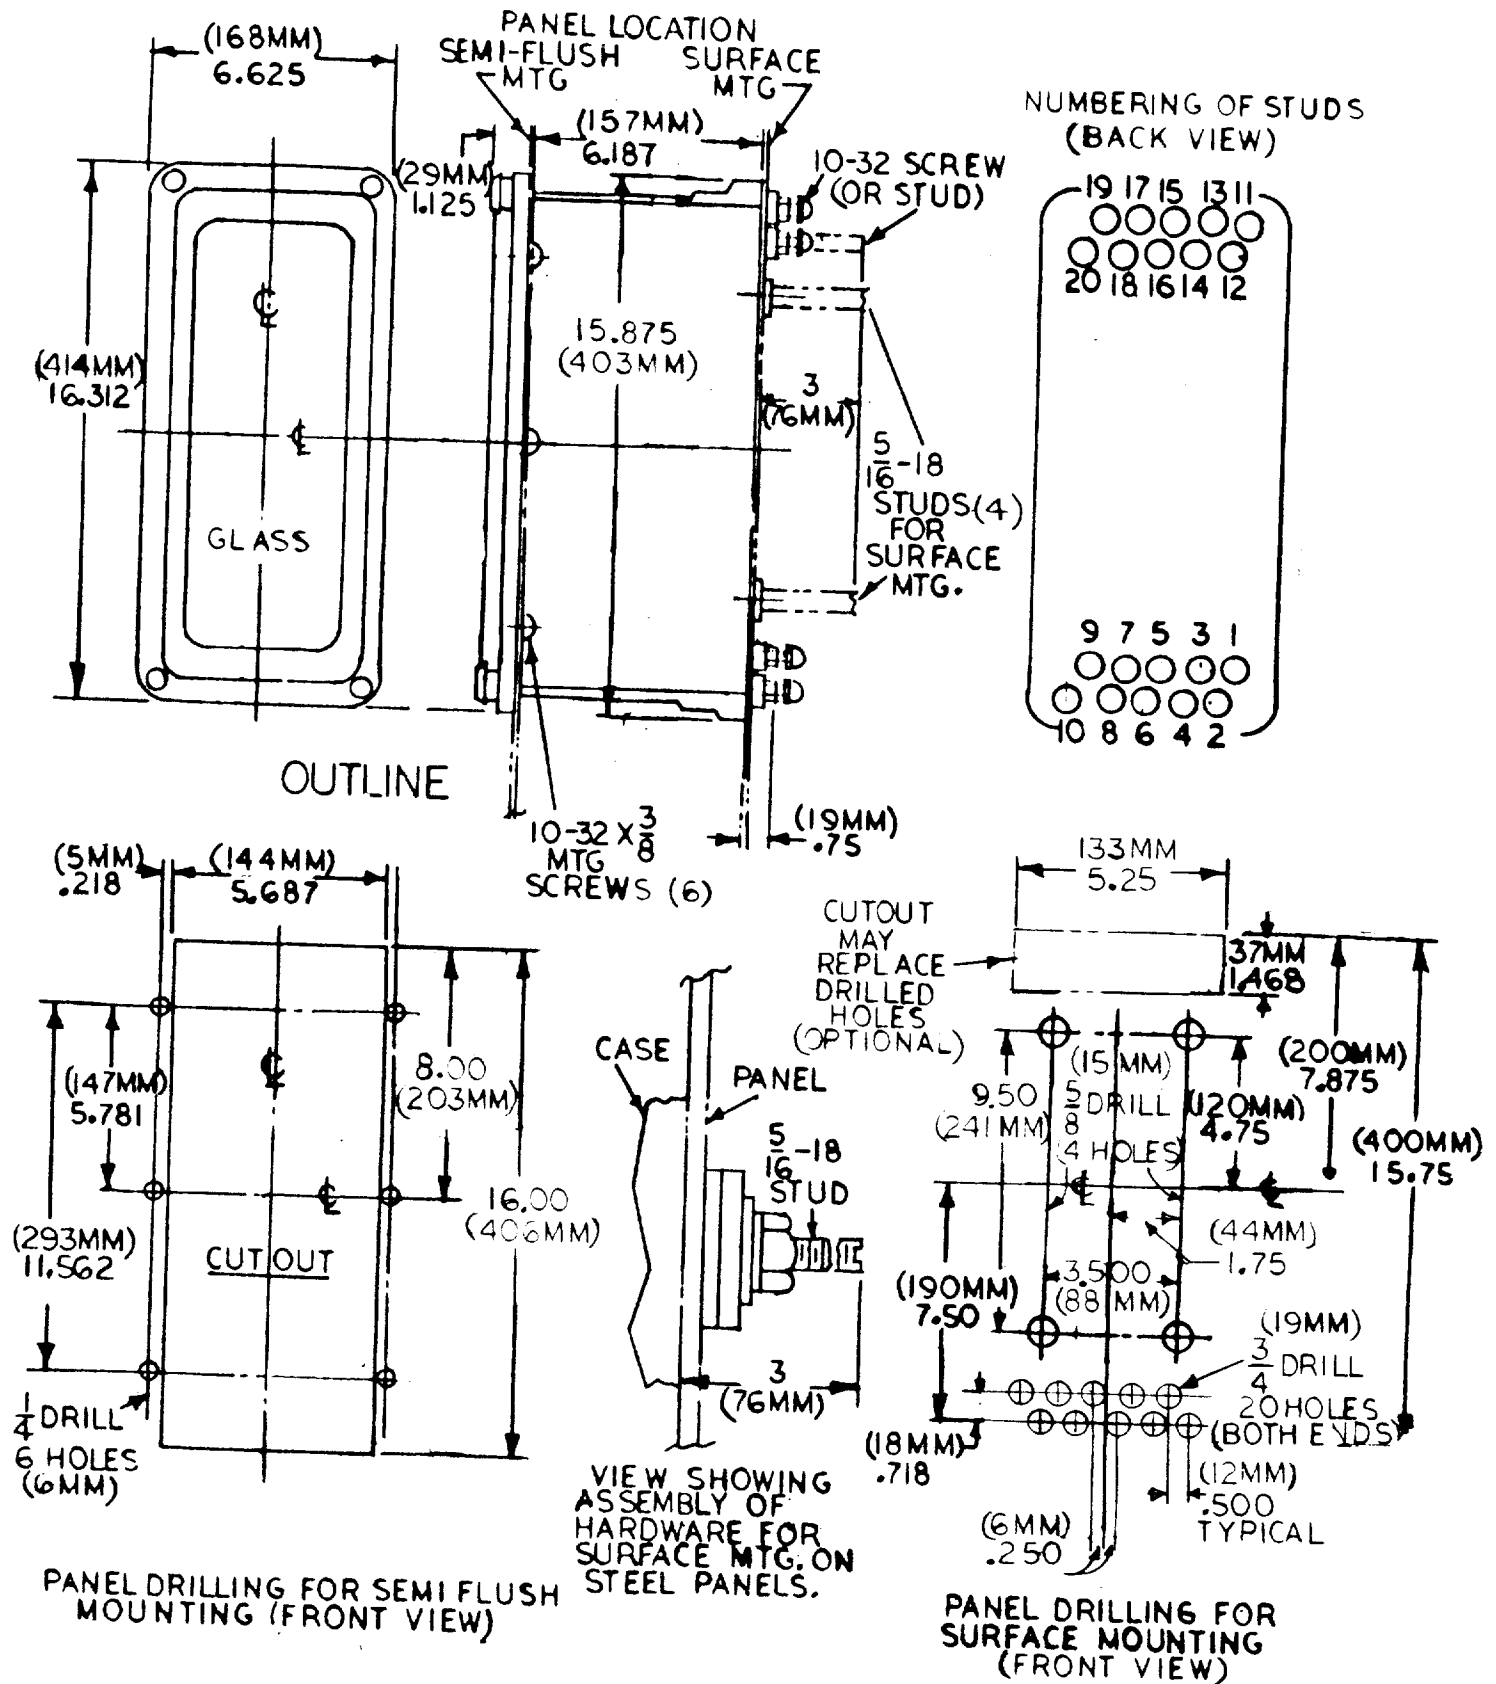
(K620974-4) Outline and Panel-Drilling Dimensions for Drawout Relays, Size M2
